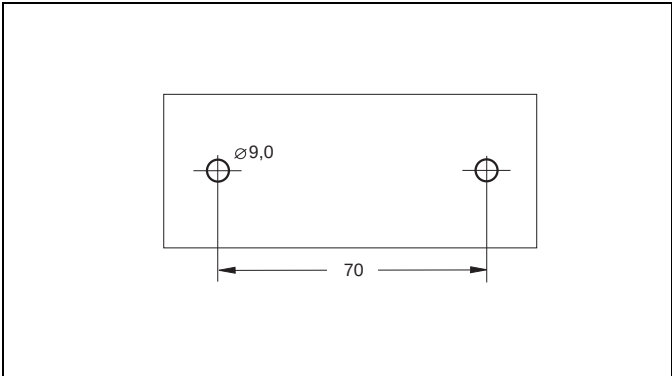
Hole pattern for the stand for the U 4810 circulating pump
